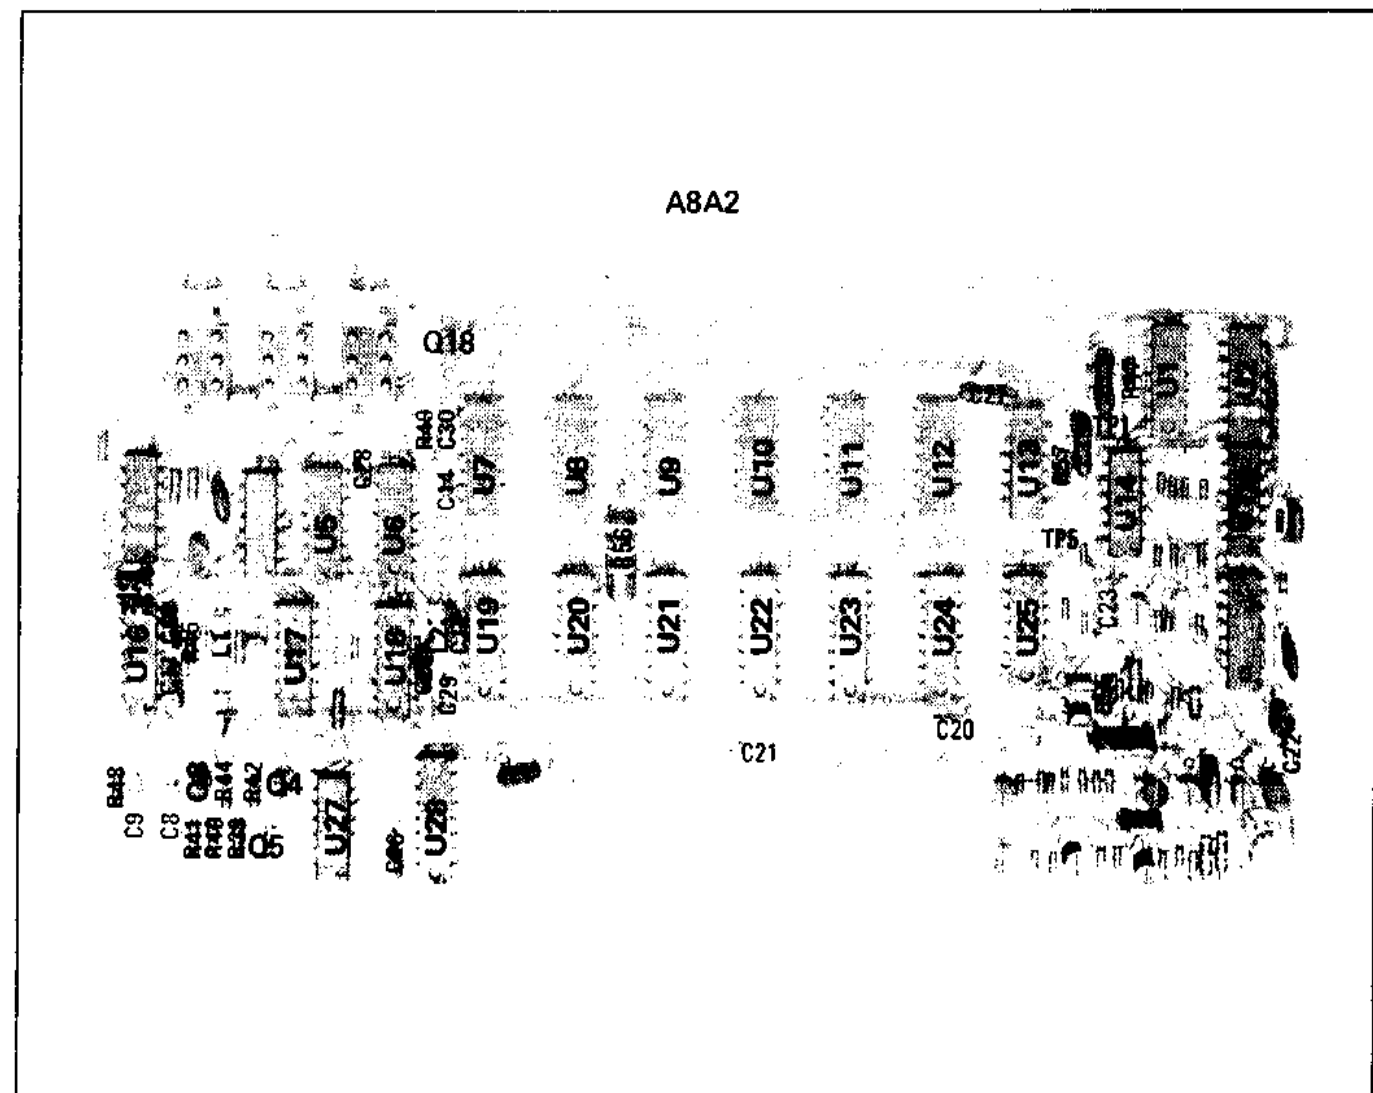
P/O A8A2 Counter/Lock Board Assembly Component Locations
